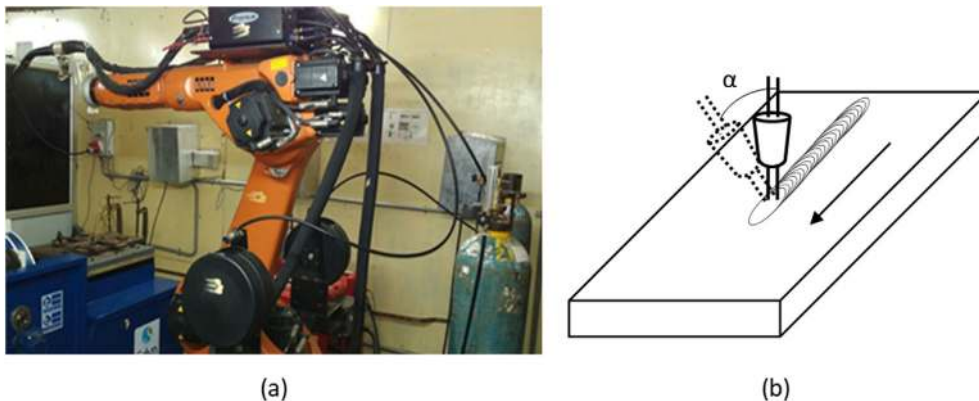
Experimental setup – (a) welding unit and (b) transverse wire welding with torch inclination.
